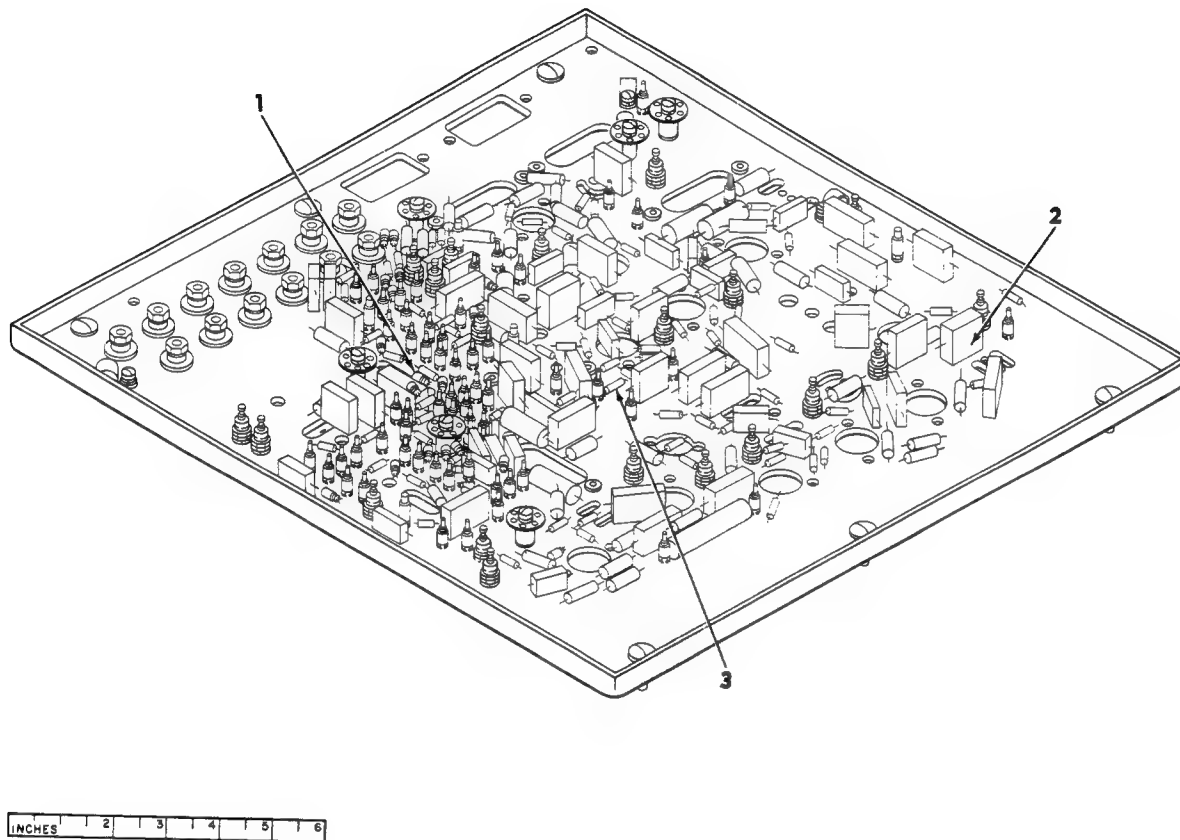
Synchronizer, electrical (9983715)—partial exploded view
